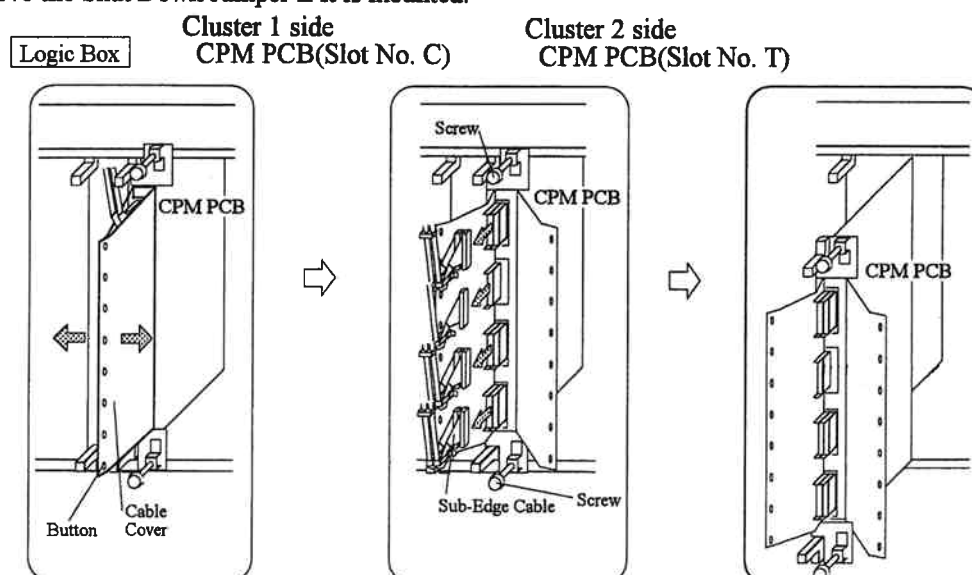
Removal of the CPM PCB
